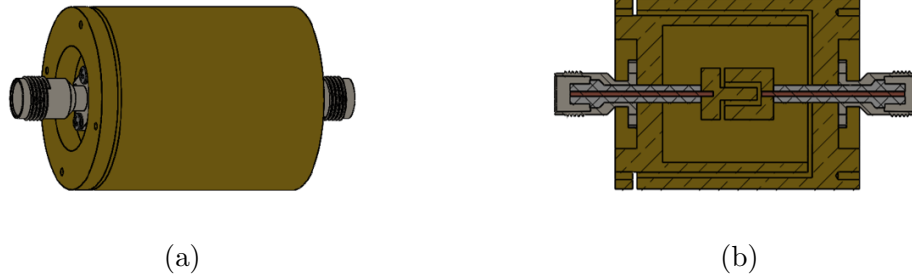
Wireless power coupler CAD model showing (a) dimetric and (b) cross section views
